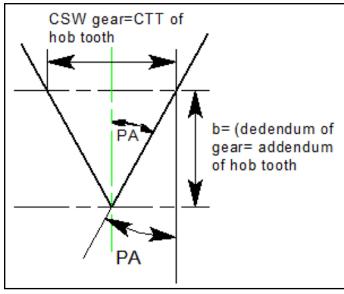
Hob tooth details for sharp corner (zero hob tip radius).
